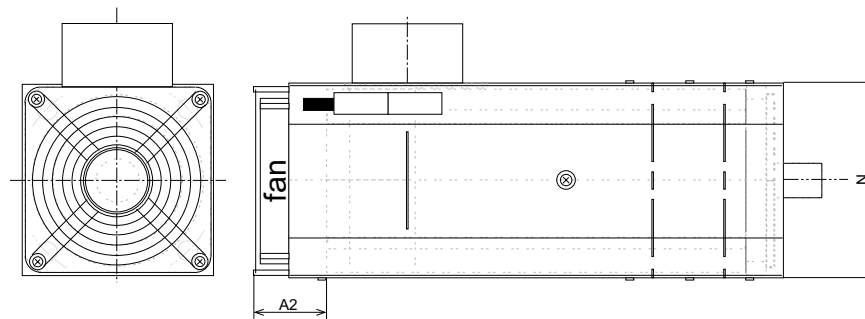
Dimensional drawing of SB Motor with surface ventilation
